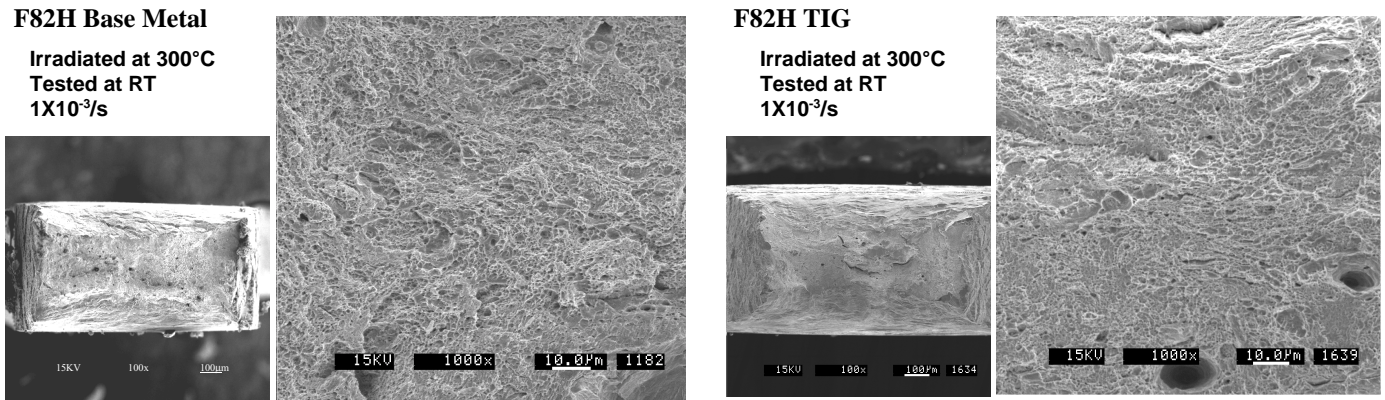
Fracture surface of F82H base metal (BM) and TIG weldment specimens irradiated at 573K and tested at RT.
